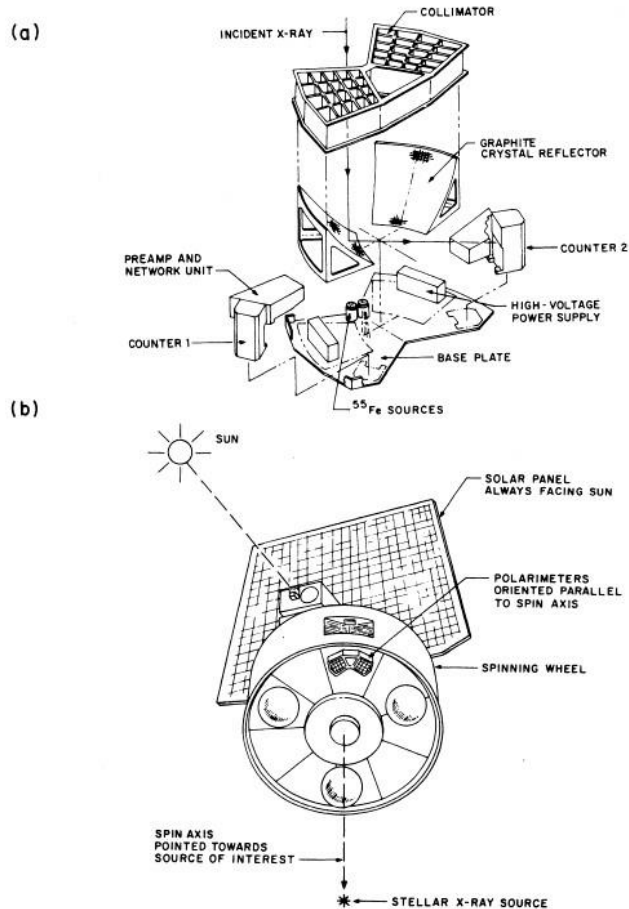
(a) Exploded view of the OSO-8 polarimeter assemblies. (b) Location of the polarimeters in the satellite.
